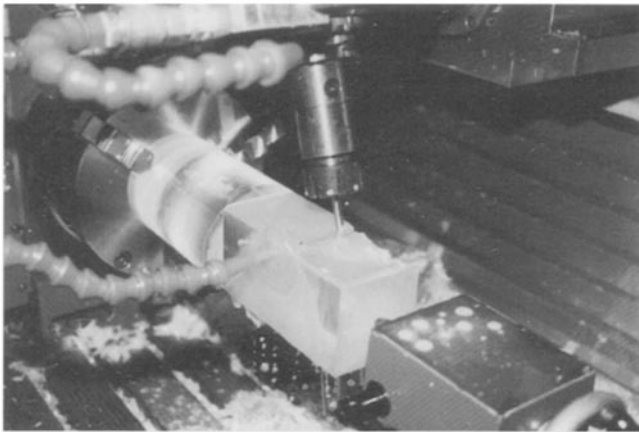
Machining by the table/spindle-tilting type of machining centre.
